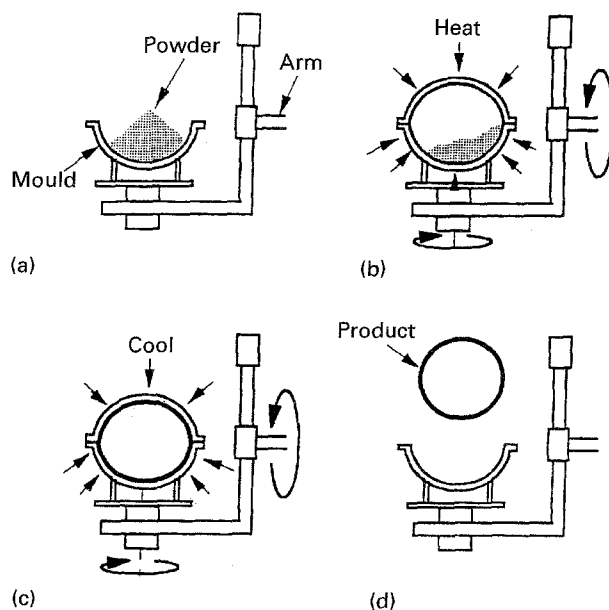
Principles of rotational moulding: (a) mould charging, (b) mould rotation and heating, (c) mould rotation and cooling, (d) de-moulding.
